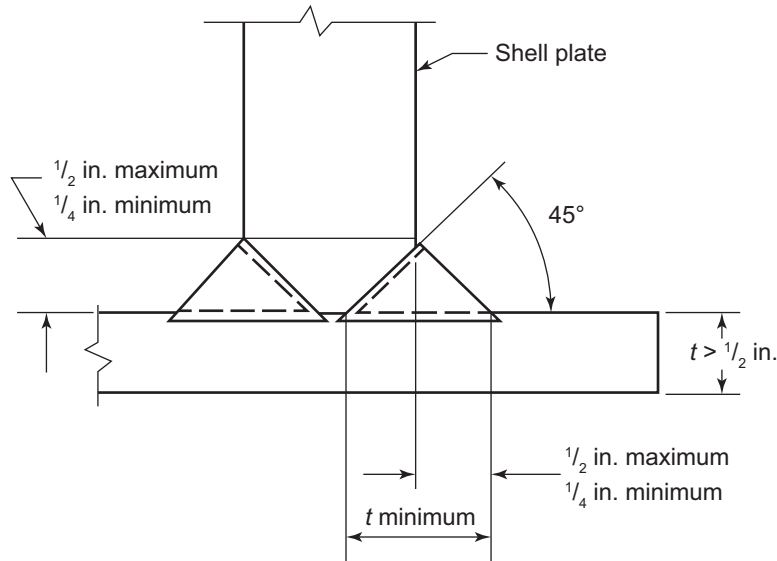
Detail of Double Fillet-groove Weld for Bottom Plates with a Nominal Thickness Greater than $\frac{1}{2}$ in. (See 5.9.5.3)
